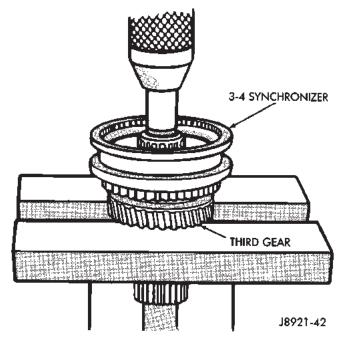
Remove 3-4 Synchronizer And Third Gear
